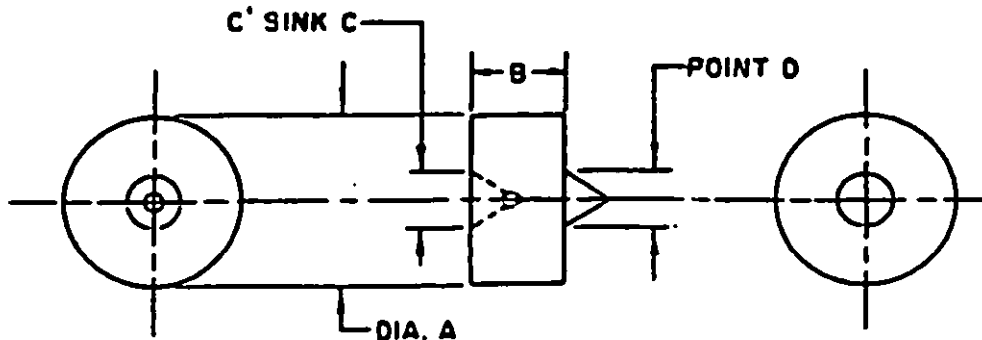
Type XIII, class 3, puller adapter, mechanical, gear and bearing, spacer.
